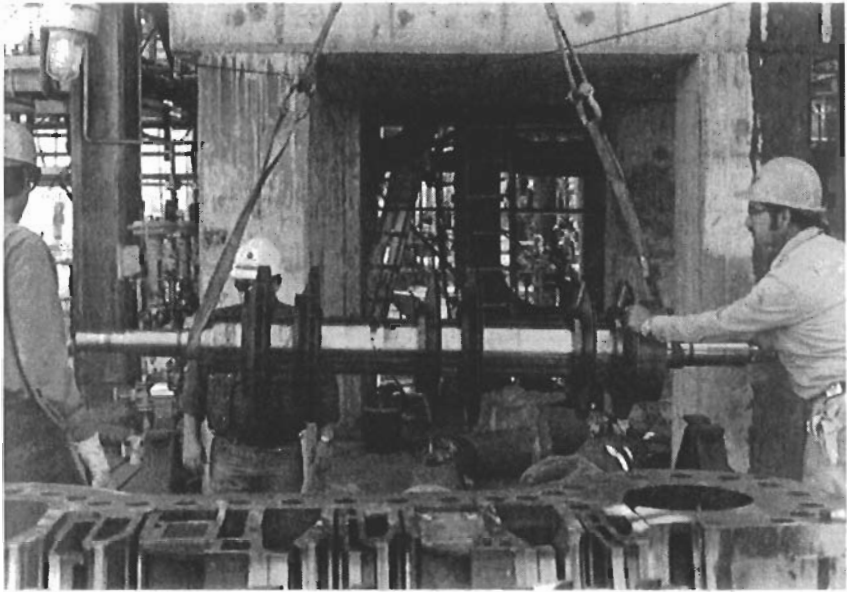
Kingsbury-type thrust bearing, OB end. (2 hours into the job.)
